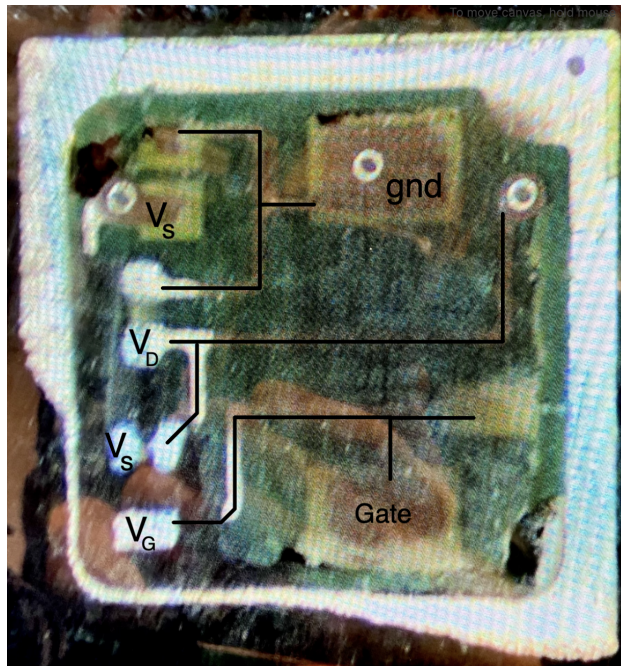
The back side of the sensor after being sanded down. This reveals the traces of the PCB. It is clear that no important traces go along the lower edge below the gate and that this part of the sensor can be safely removed
